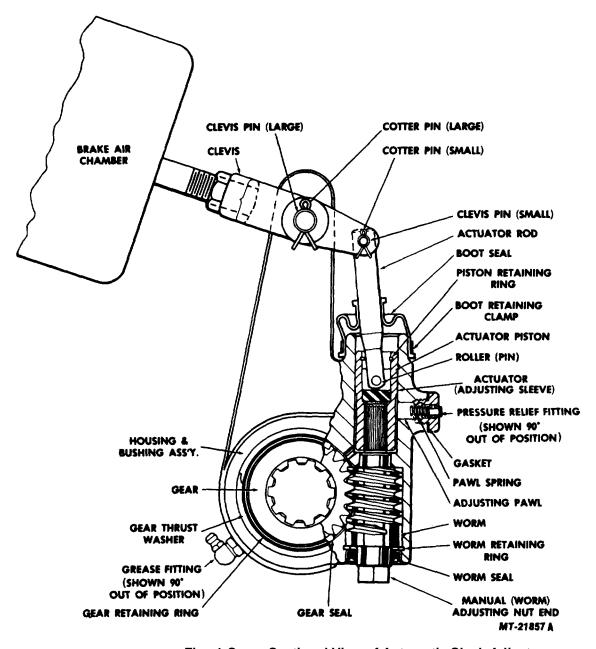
Cross Sectional View of Automatic Slack Adjuster
